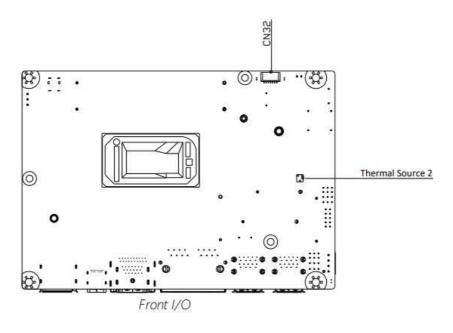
Jumpers and Connectors Location- Board Bottom
